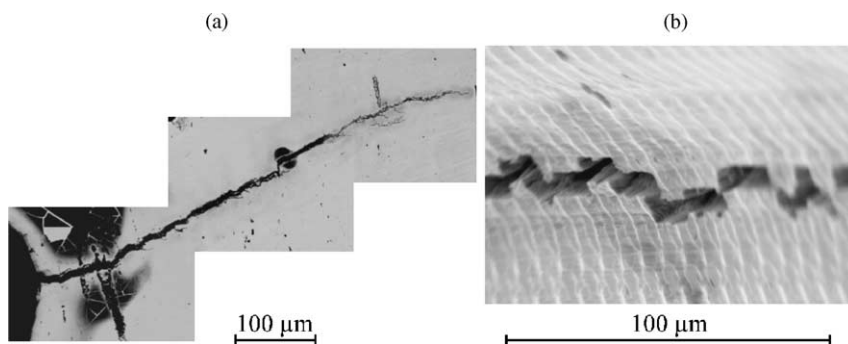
Artificial thermal fatigue crack at the bottom of a thread: (a) cross-section and (b) crack opening on the surface of the thread bottom.
